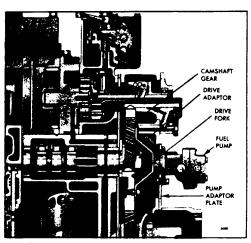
Camshaft Drive for Fuel Pump (6V Engine Shown)
